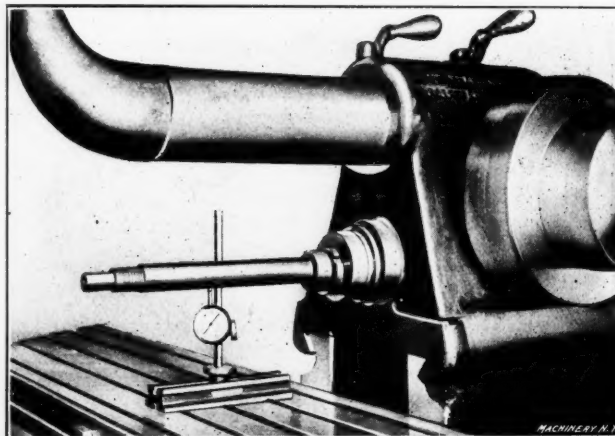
Testing Crosswise Adjustment of Milling Machine Table
